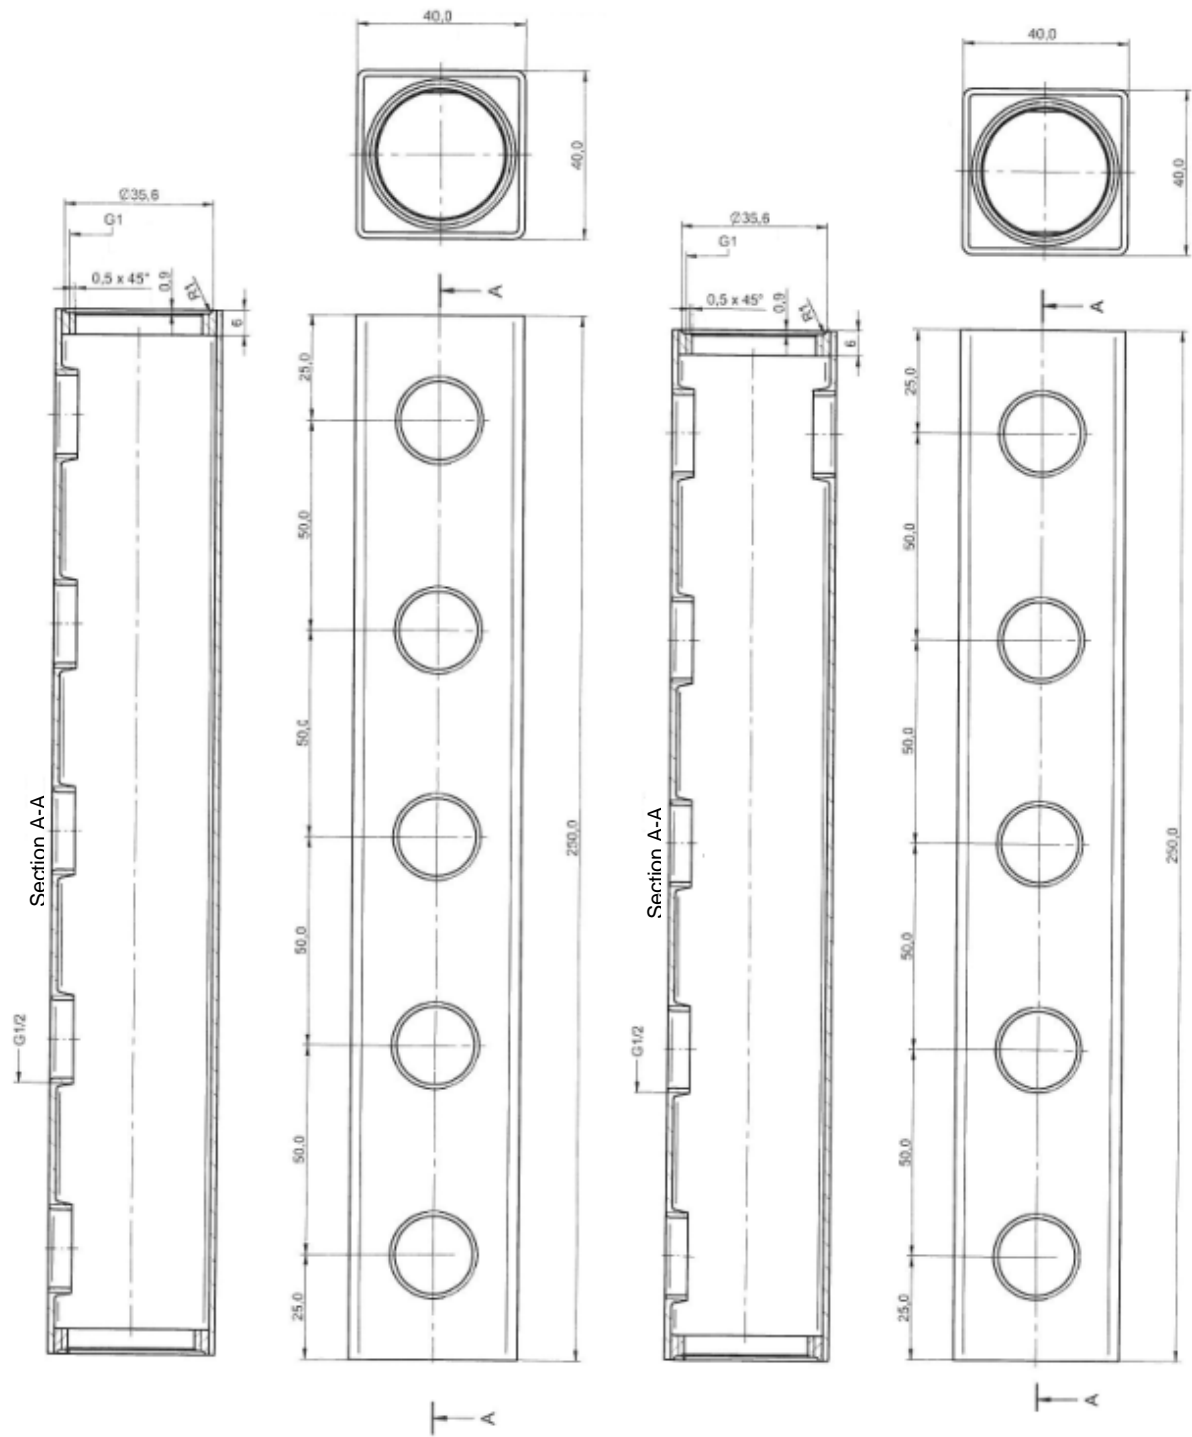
Supply and return pipes for CAPRICORN manifolds, stainless steel, square cross-section
